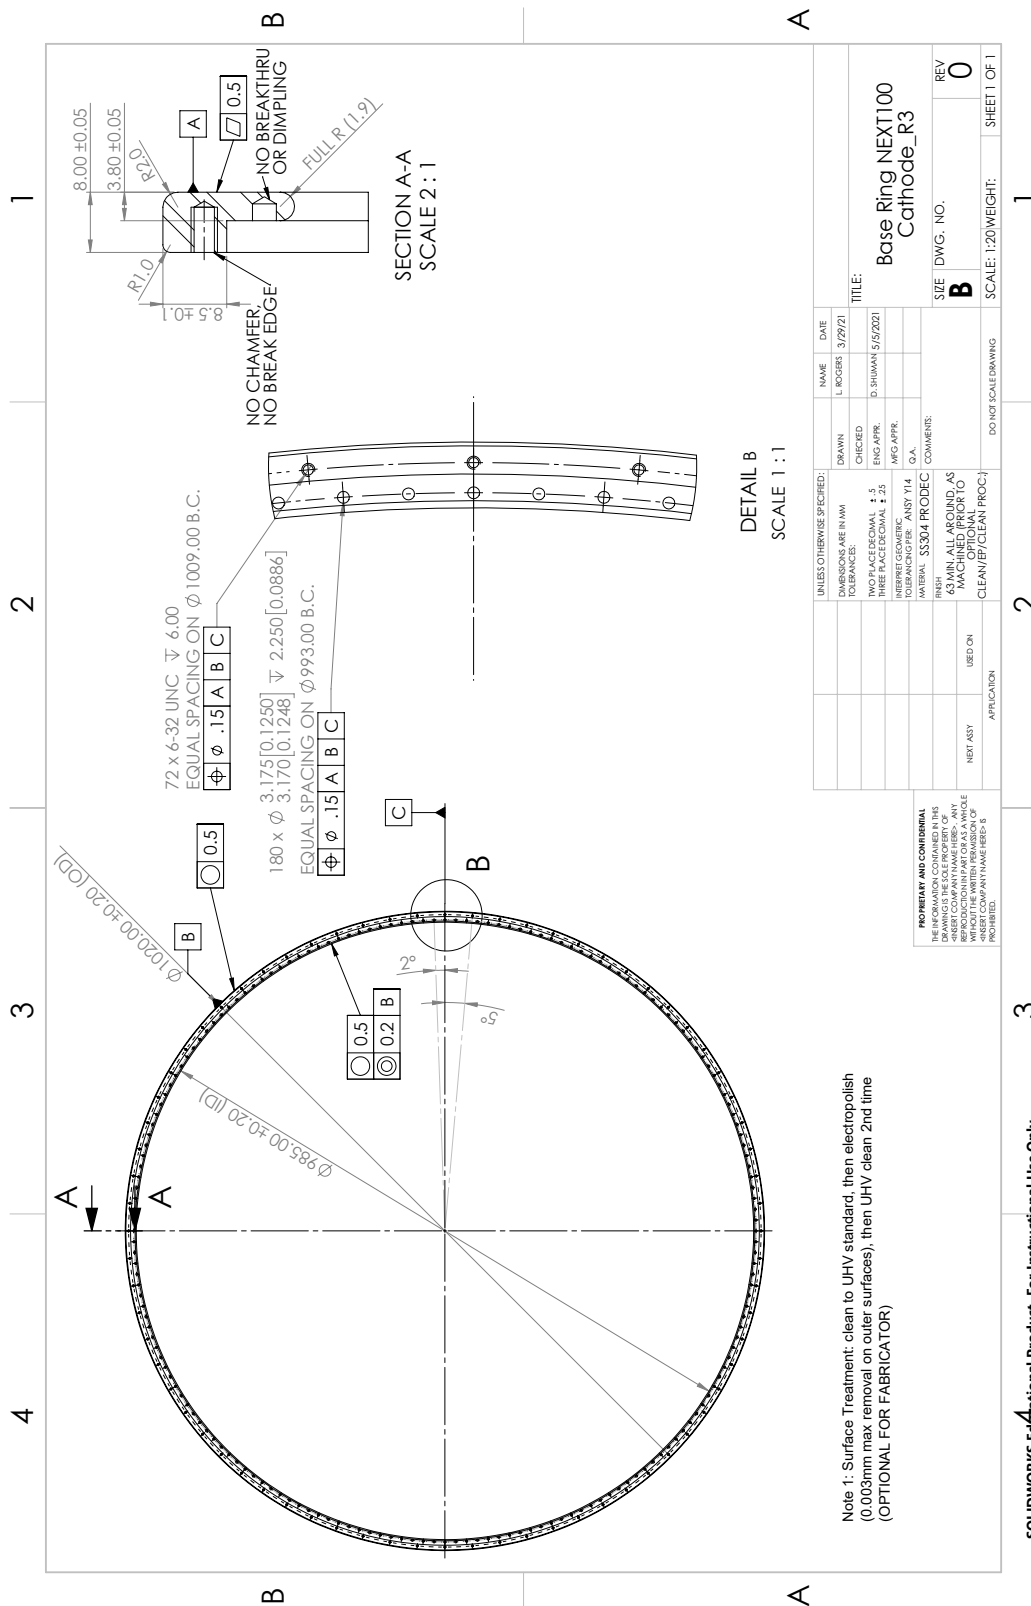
Machine drawings for manufacturing the Cathode Base ring.
